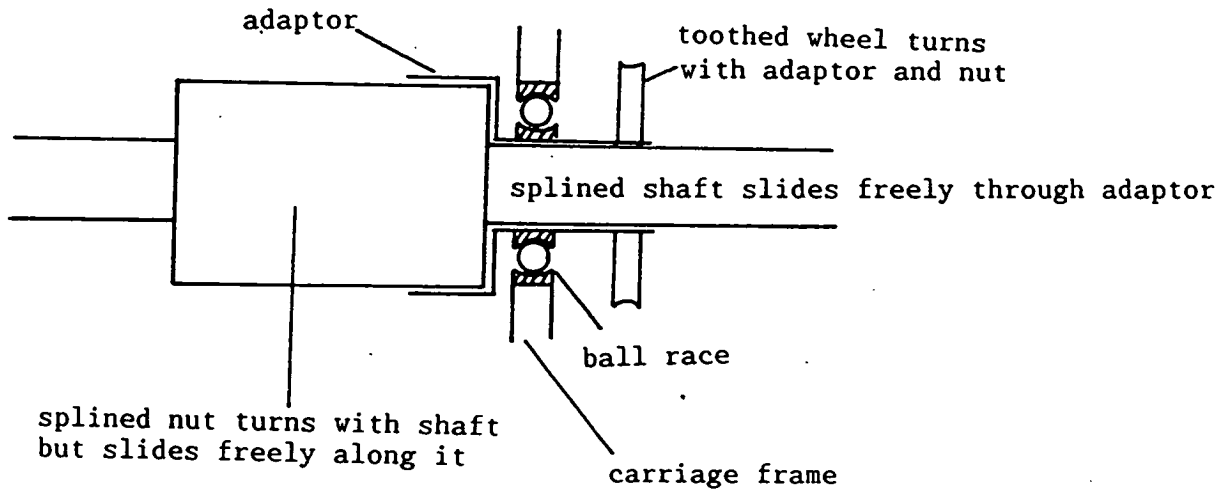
Connections between the drive shafts and the motorised carriage. Main carriage with faceplate removed.
